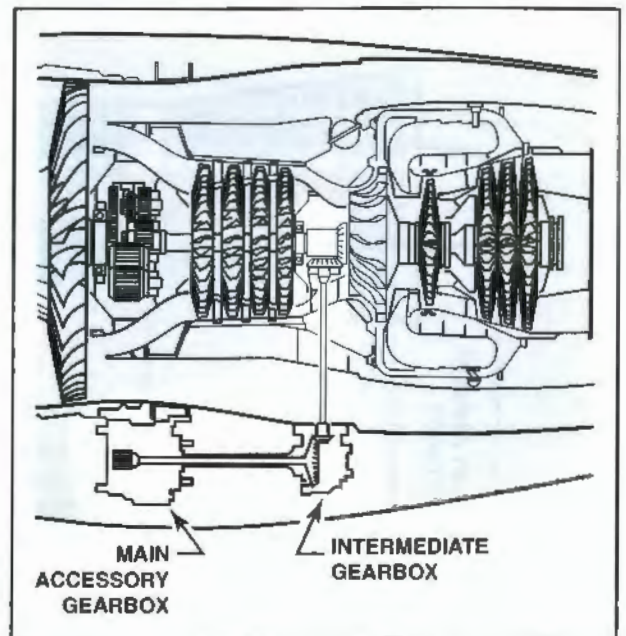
With a typical waist-mounted accessory section, a radial shaft geared to the main engine shaft transfers power to the drive pads through an intermediate gearbox.
